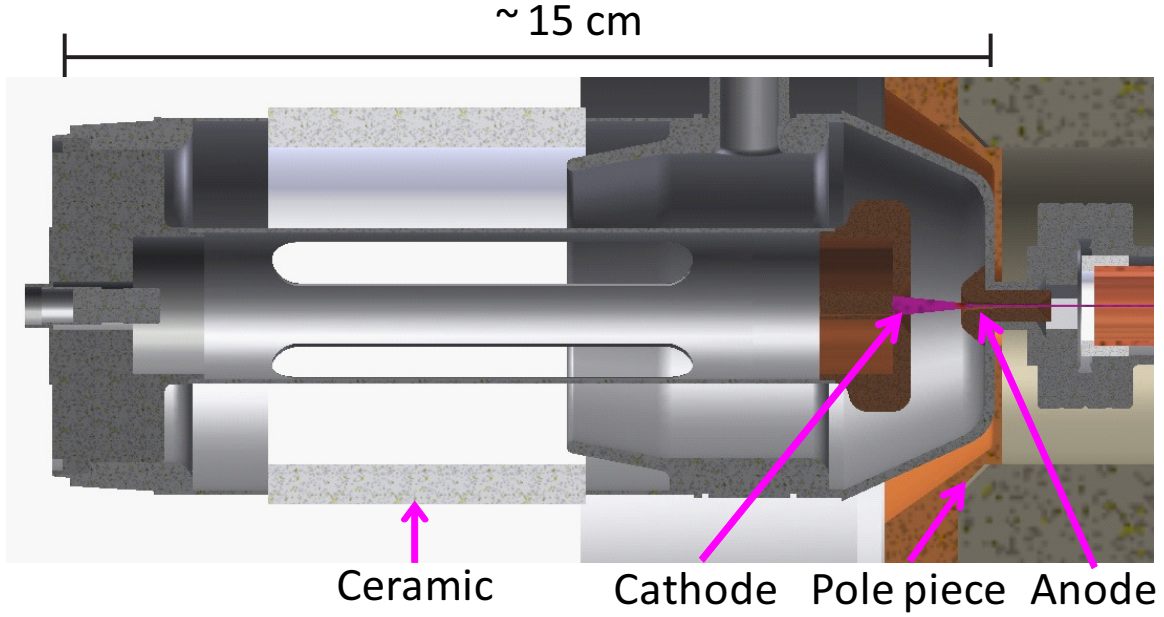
A cross-sectional view of the electron gun modeled in Autodesk Inventor with cold dimensions.
